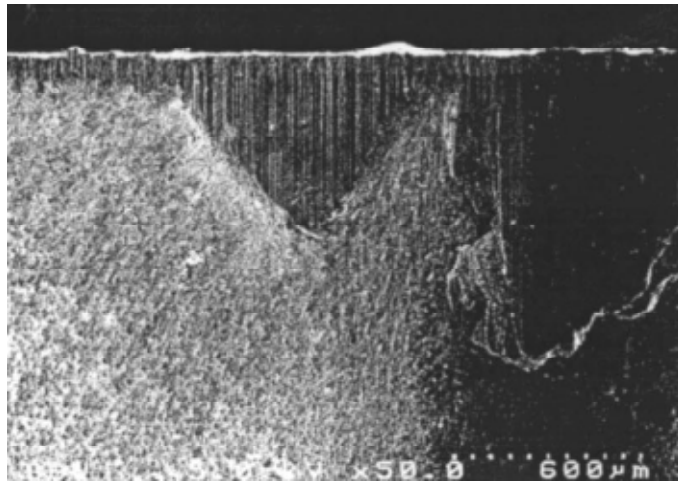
SEM image of flank face of CVD diamond coated WC tool after machining Al 380/SiC/20p. Portions of the coating have been eroded by adhesion of diamond to the aluminum matrix [89]
